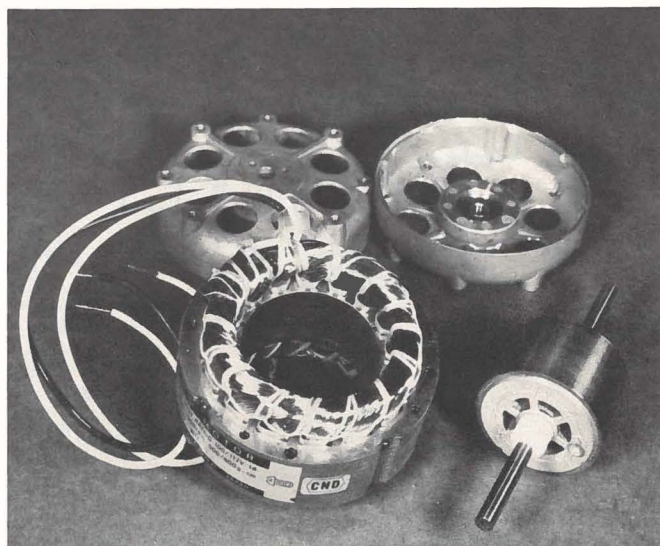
8-pole hysteresis motor disassembled to show rotor and stator.
